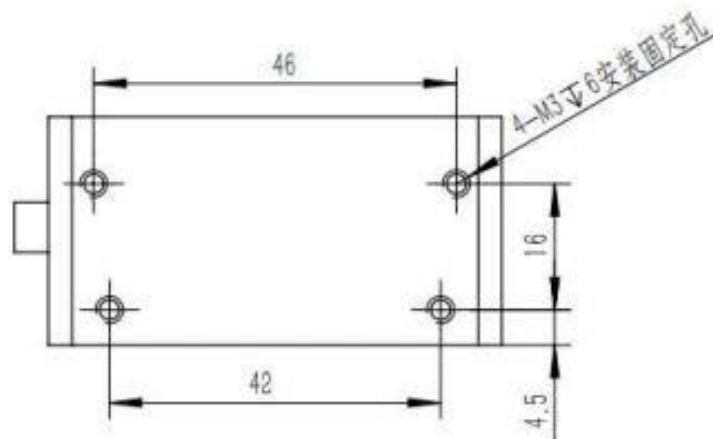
Mechanical dimension drawing (side view), 4 holes are fixing holes for installation and fixation.
